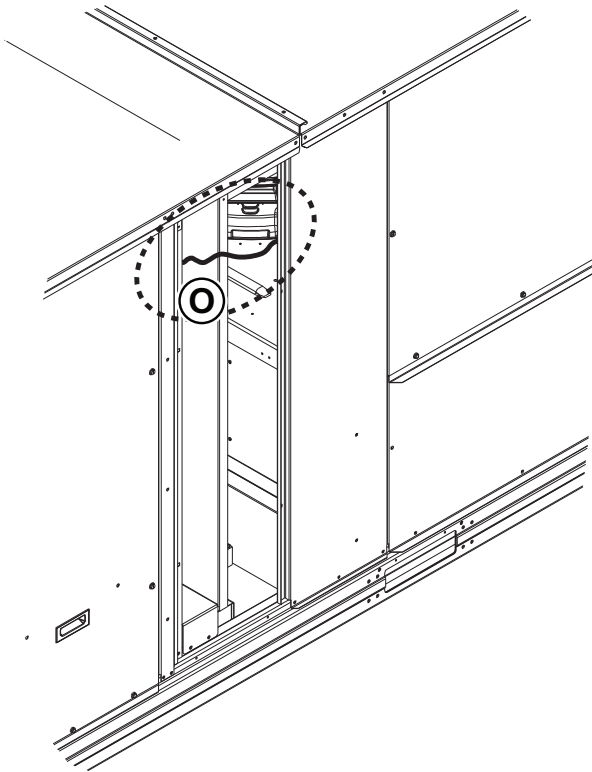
OAT Wire Routing (Filter and Indoor Coil)
